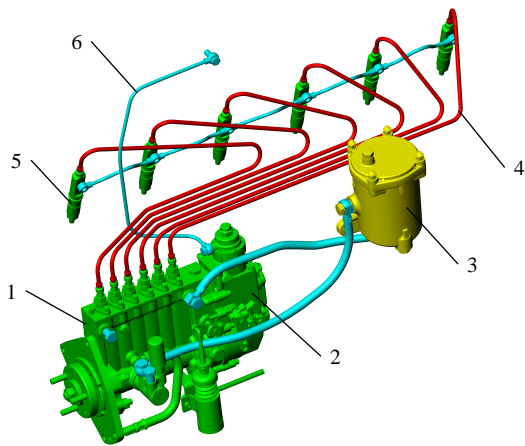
Fuel supply system layout with a MOTORPAL pump:
